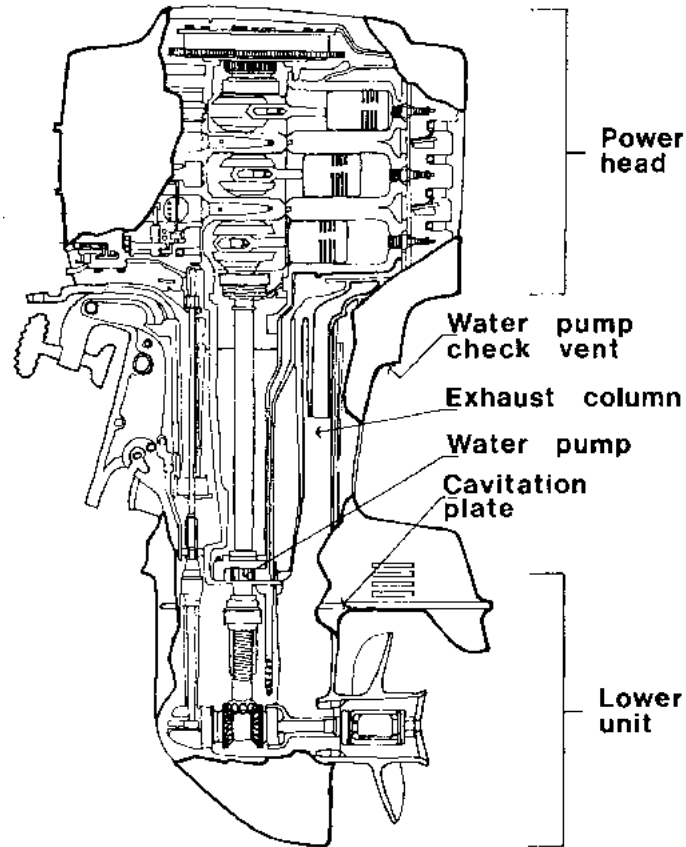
Cutaway drawing of typical internal combustion, reciprocating outboard engine (Otto Cycle).
